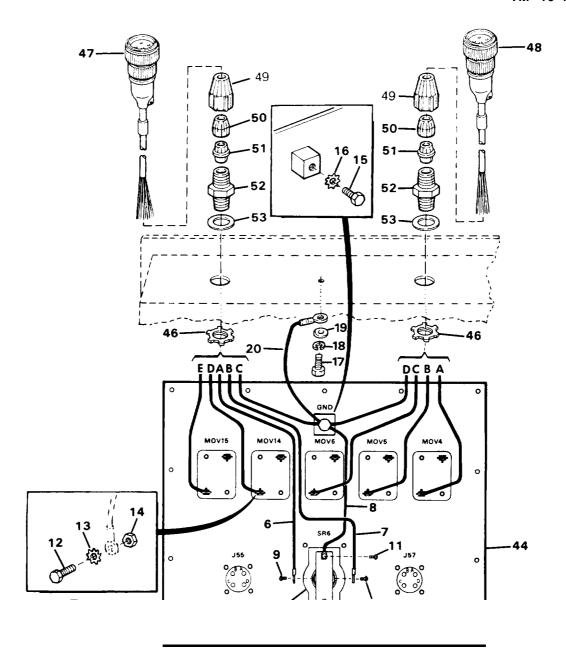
Raw Water Pump External Electrical Panel Assembly (sheet 1 of 3) Connections
